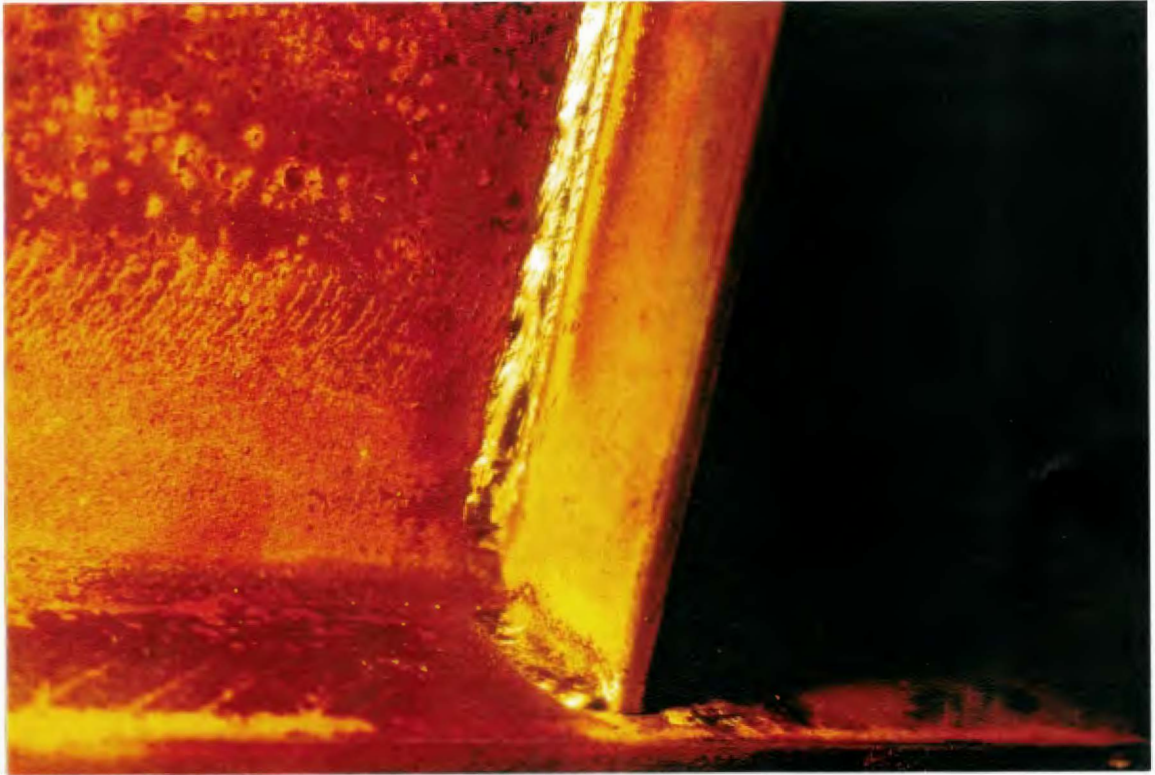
A Typical Welded Joint on the Control Specimen
